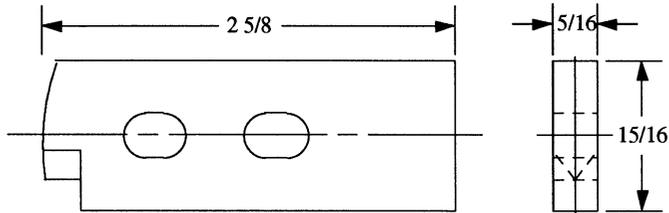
The shape and dimensions of the workpiece (dimensions are inches).
